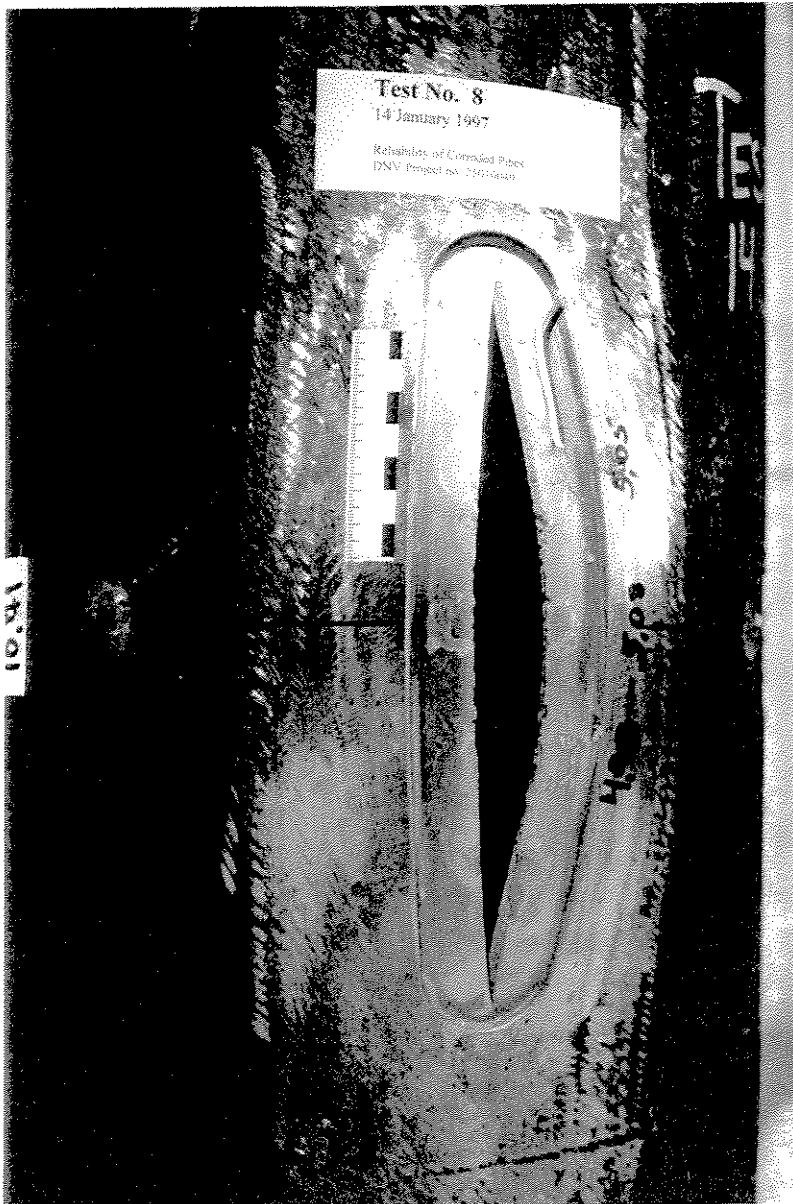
Picture of the test specimen no. 8 after the burst test
